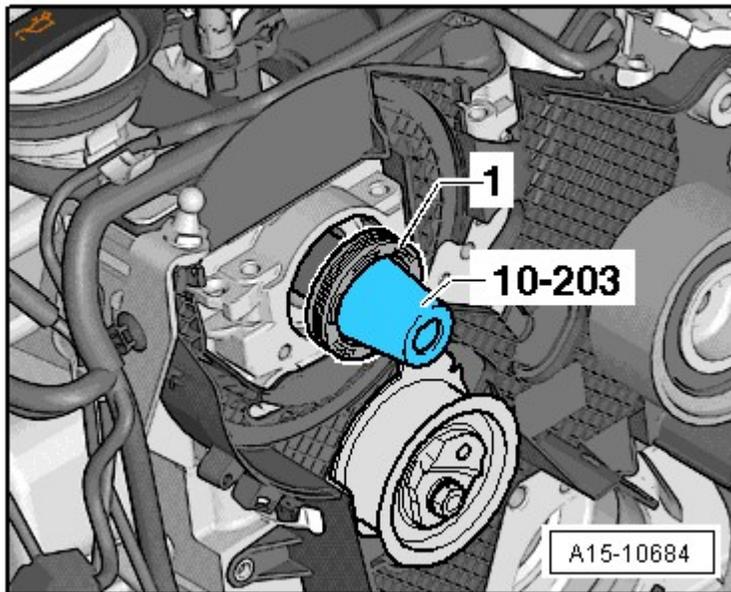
Identifying Seal -1- Pressed In To Stop Using Seal Driver 10-203
